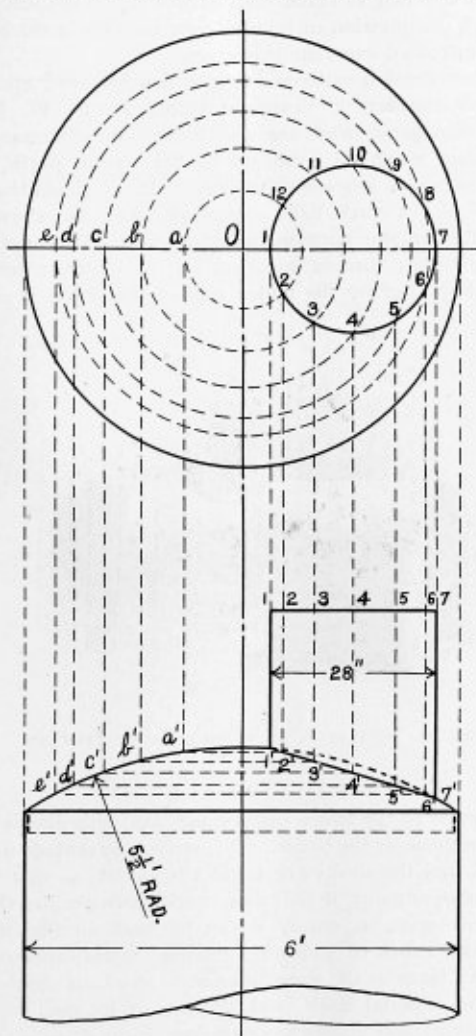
PLAN AND ELEVATION OF TANK AND PIPE.
